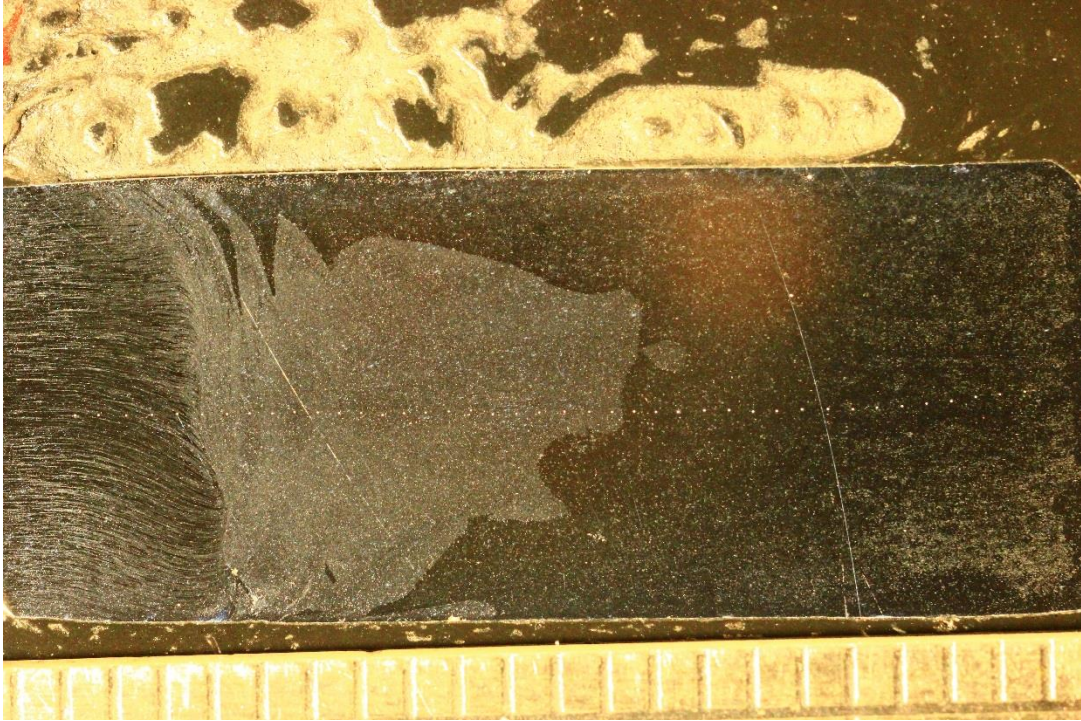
Macrograph of Weld 4 Sample 5
